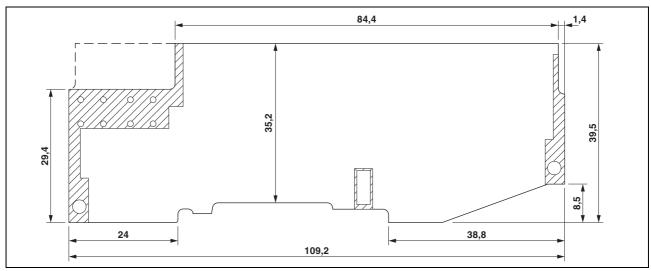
Maximum dimensions of the vertical low PCB of the 10U L lower housing part without the use of the DIN rail connector, with 8U and 10U housing cover
